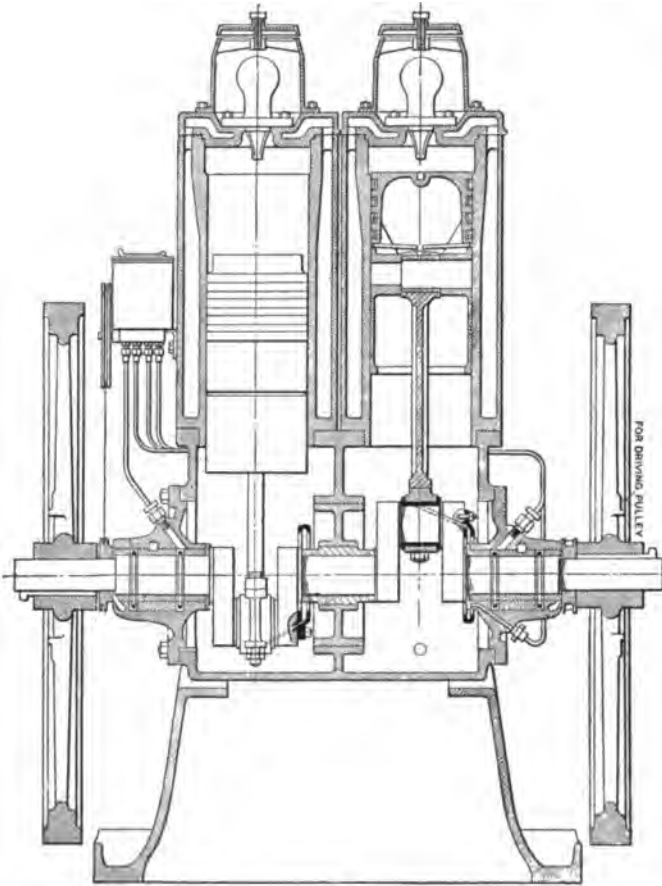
Mietz and Weiss low-pressure oil engine, showing lubrication system.
